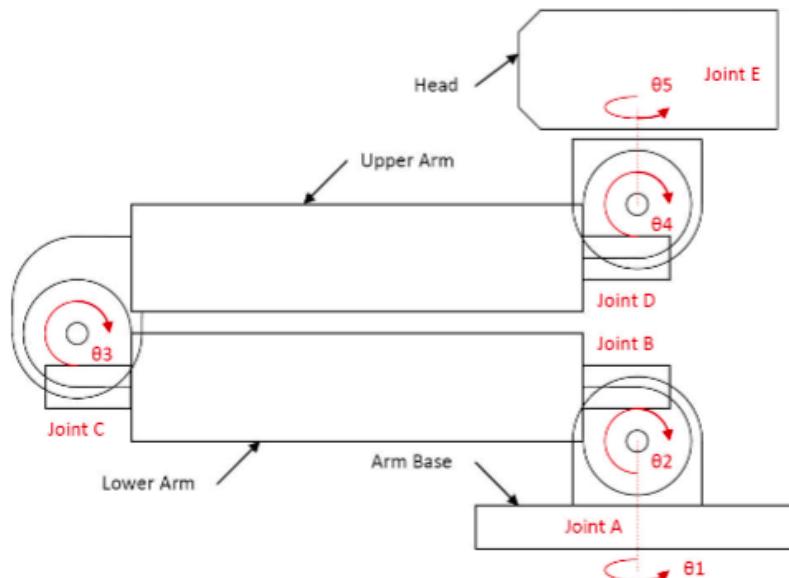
Champion robot arm design shown with 5 rotary joints, (Rushforth, 2017)
